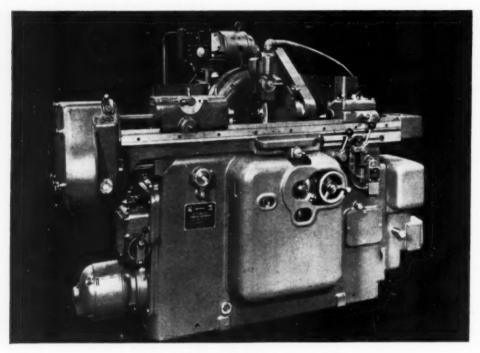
6 × 36 AUTOMATIC THREAD GRINDER
